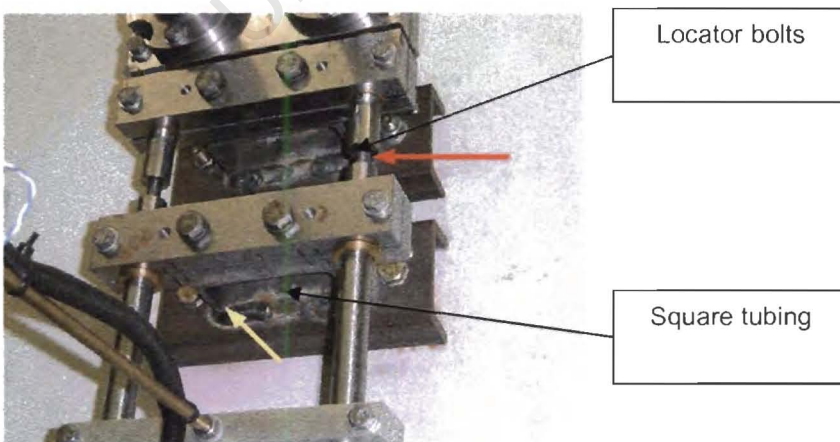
Shaft End supports with locator bolts and square tubing
